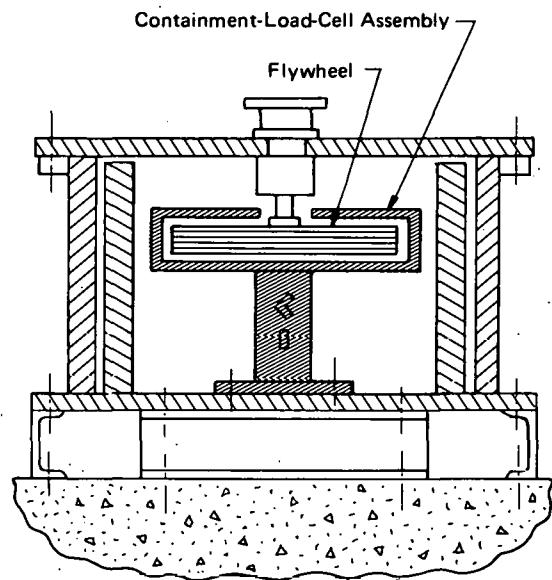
FLYWHEEL-CONTAINMENT ASSEMBLY, DEPICTED IN A SPIN TEST STAND.
